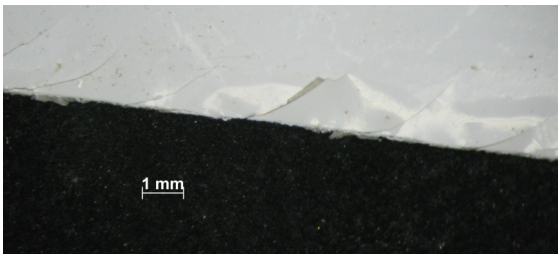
Cutting edge of specimen that was cut after damp heat exposure.
